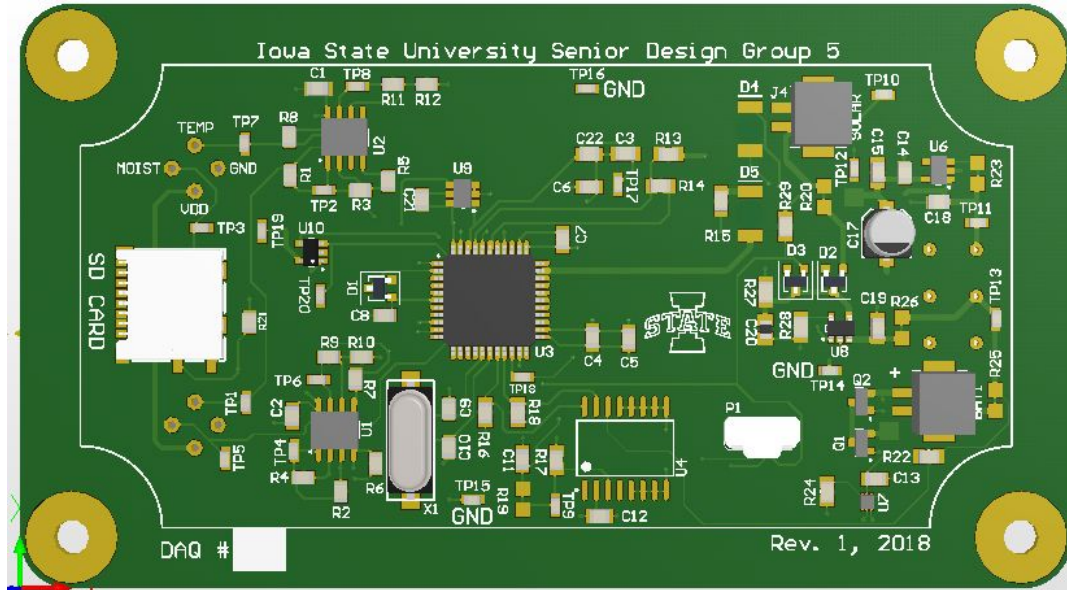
3-D Rendering (Bottom View) of DAQ PCB
